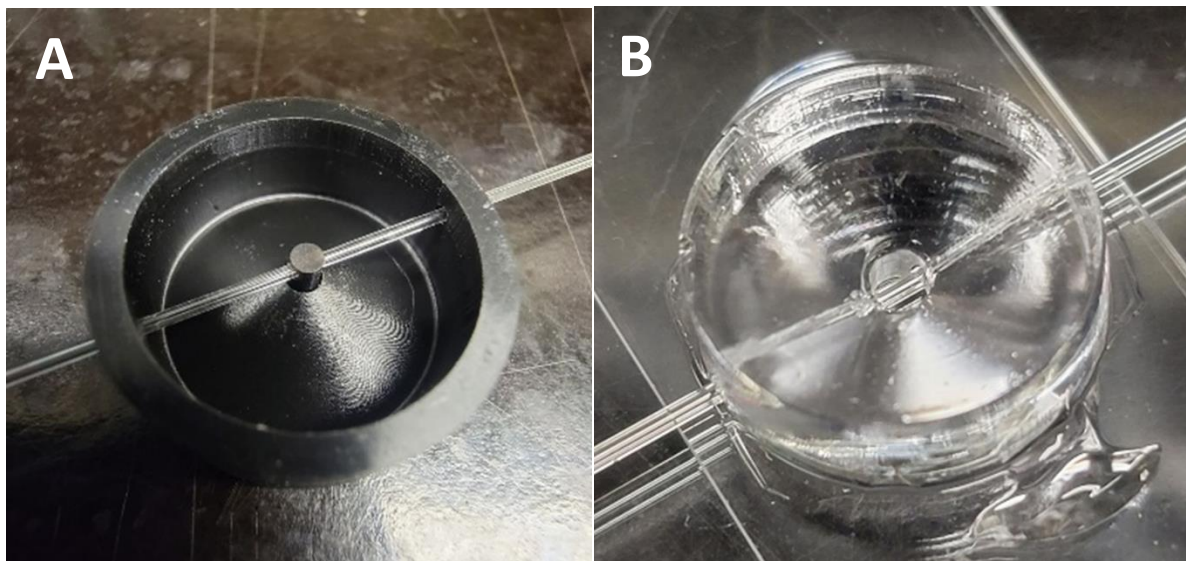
(A) 3D-printed master mold with capillary tube ready for PAAm gel solution loading. (B) PAAm well molded and peeled-off from the master mold.
